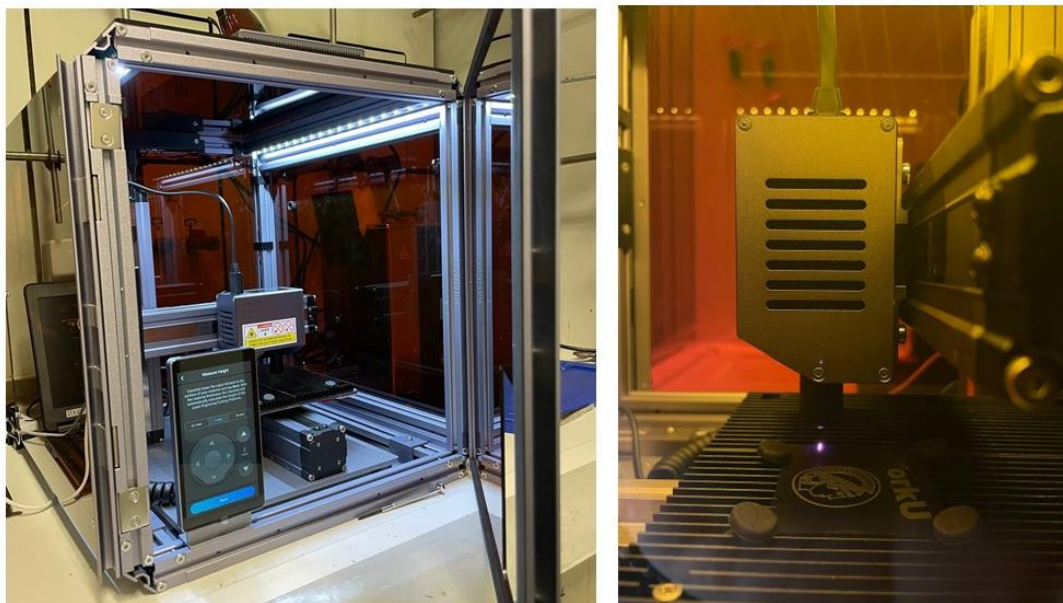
The Snapmaker 2.0, A350T 3in1 laser machine.
